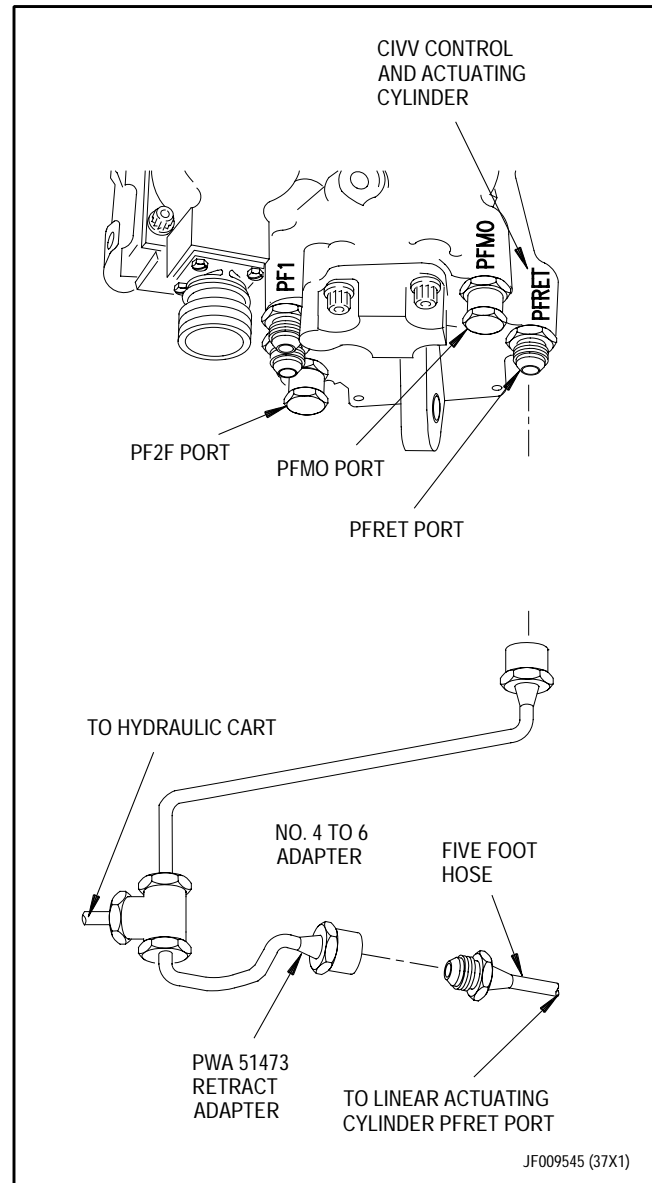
Compressor Inlet Variable Vane System - Tooling Installation (Sheet 1 of 3)
